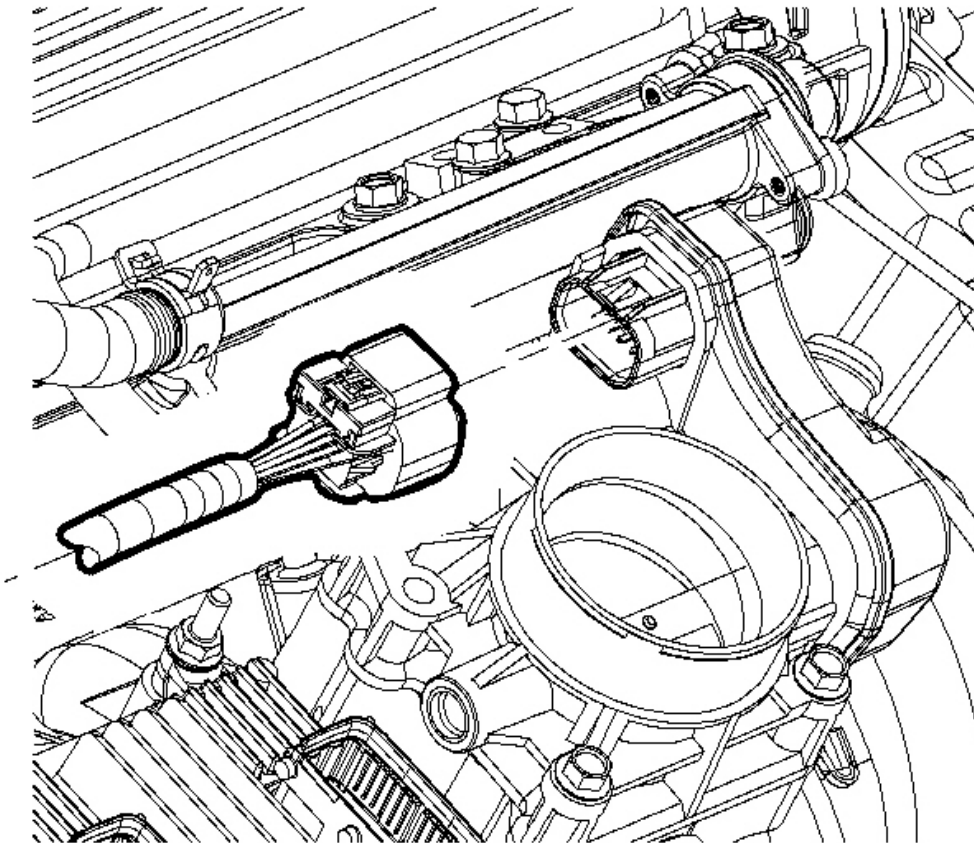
Disconnecting/Connecting Throttle Body Electrical Connector
